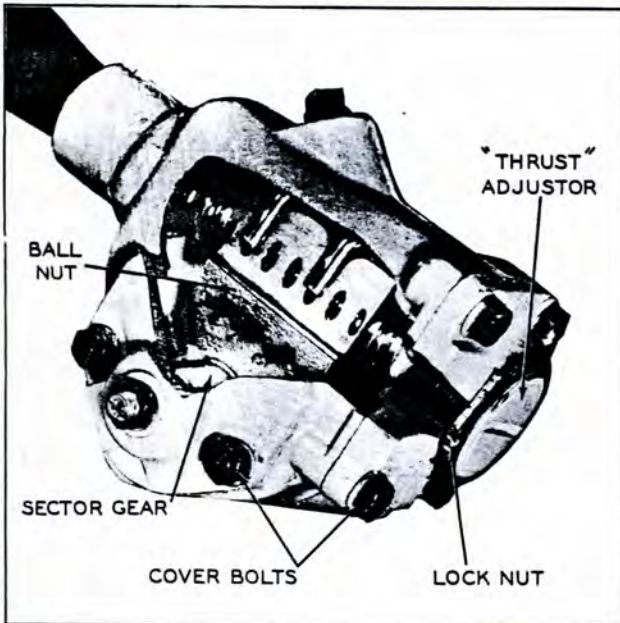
Steering Gear Thrust Adjustment (Worm Bearings)
